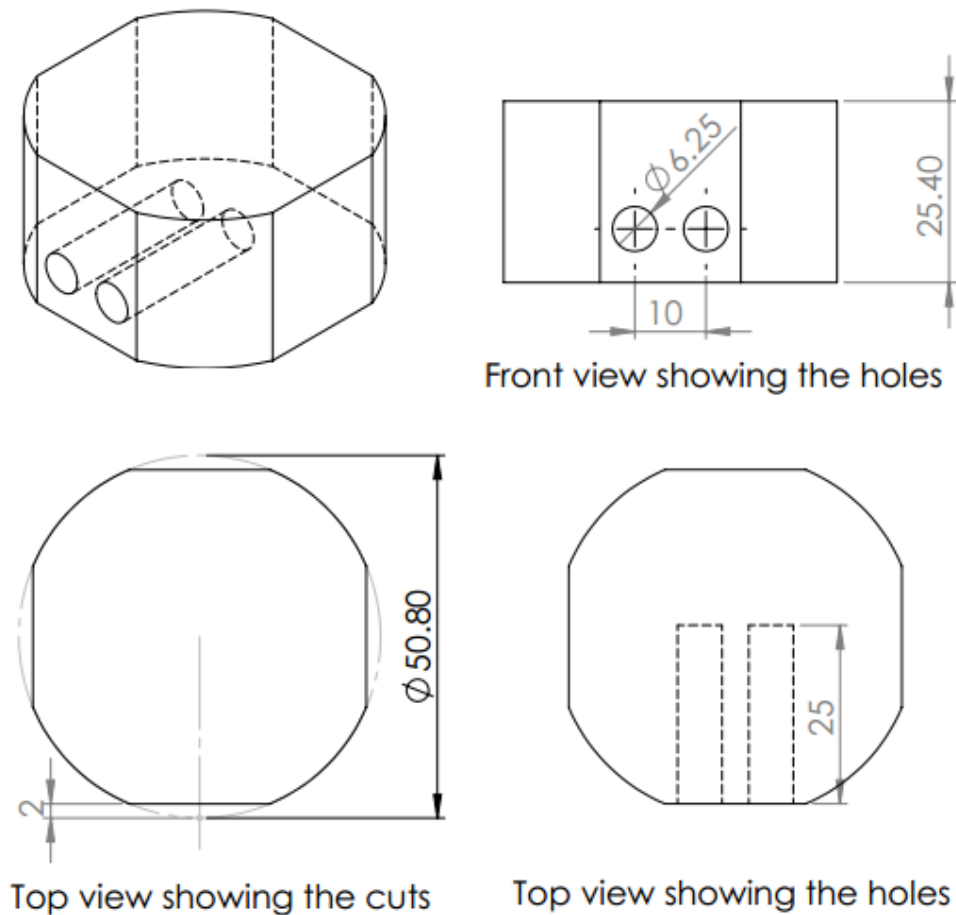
Design of the aluminium block. View of the whole block, front view showing the holes, top view showing the cuts and top view showing the holes. All dimensions are in mm.
